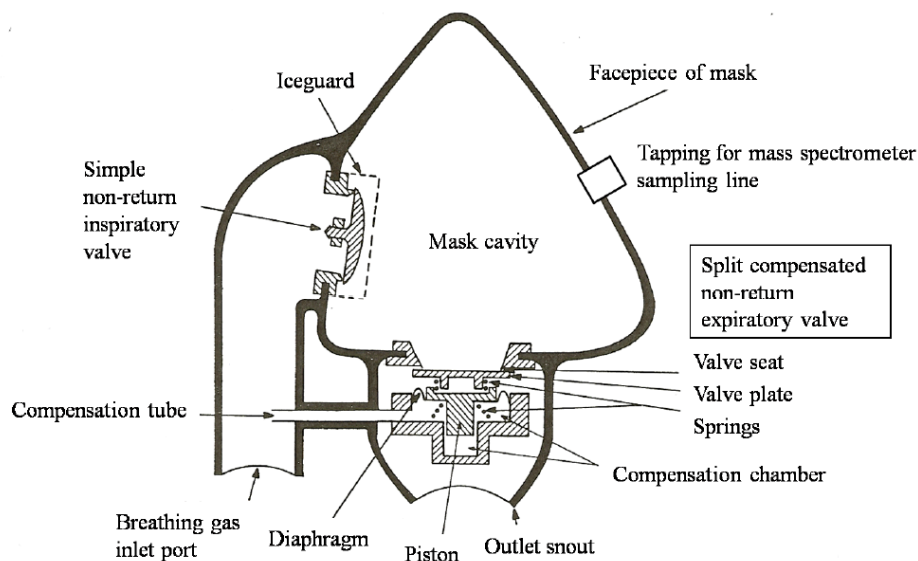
Schematic of the P/Q mask showing the inspiratory and expiratory valve assemblies.
